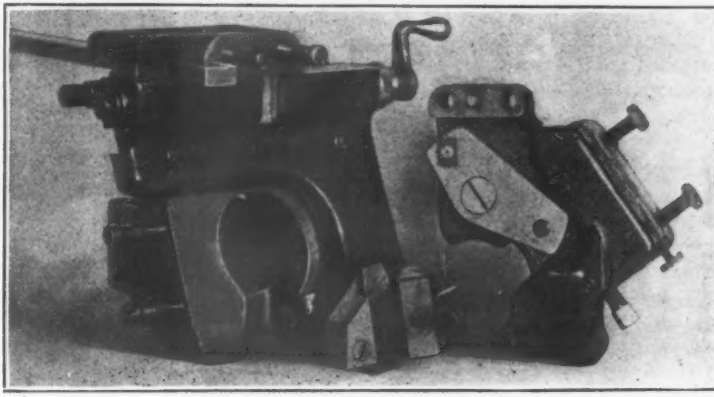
The Taper Turning Tool with the Back Rest Removed.
